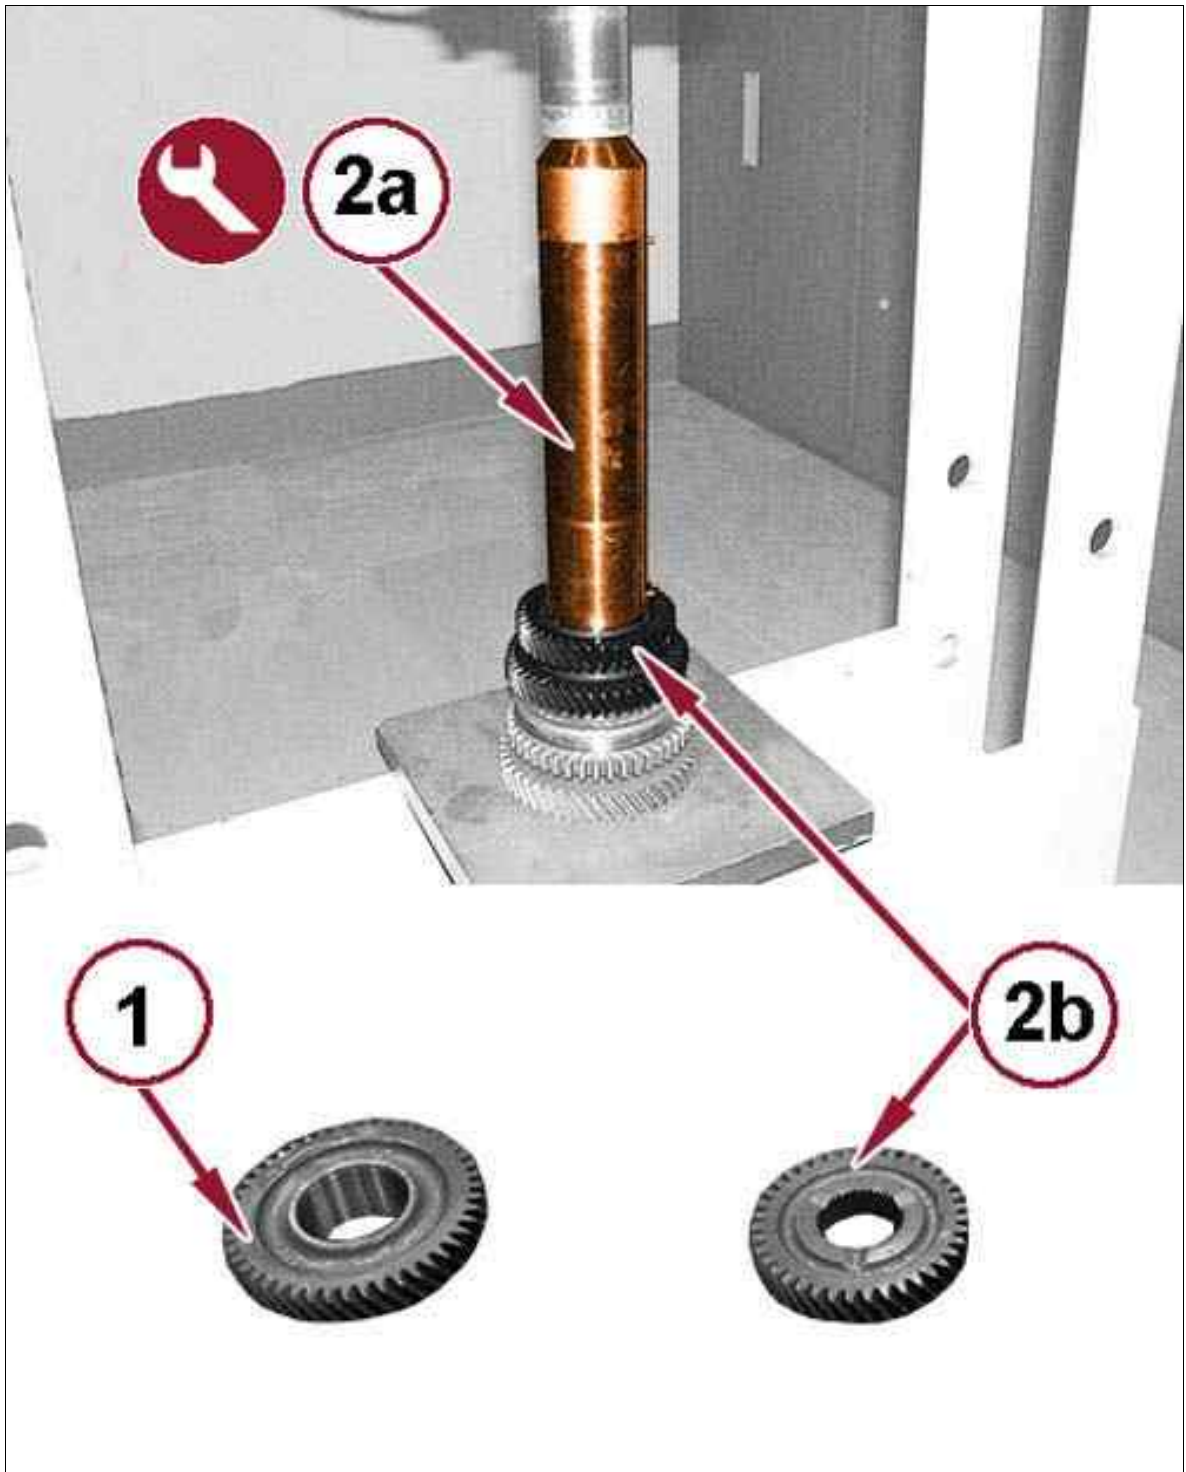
2nd Gear Synchronizer Rings & 2nd Speed Driven Gear Needle Bearing
